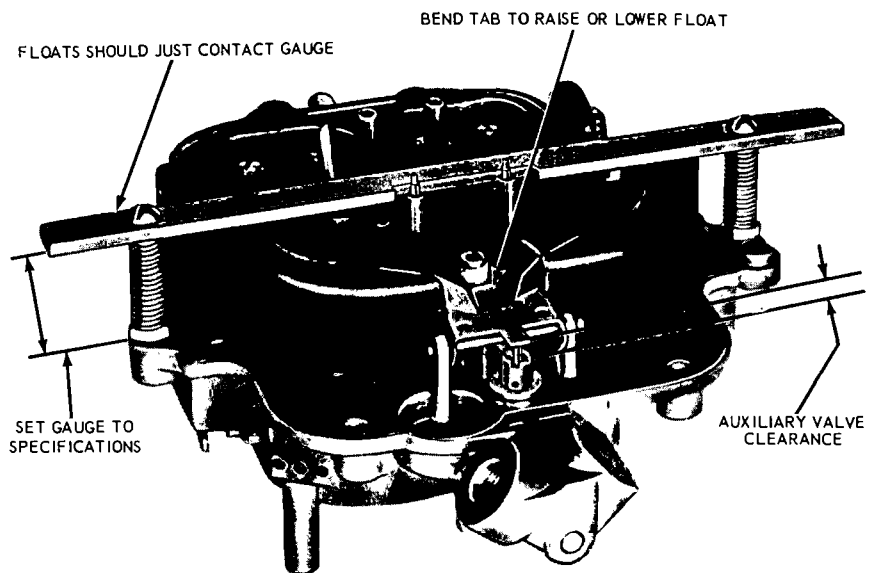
Float Gauge and Bending Tool Details — Autolite Model 4300 4-V
